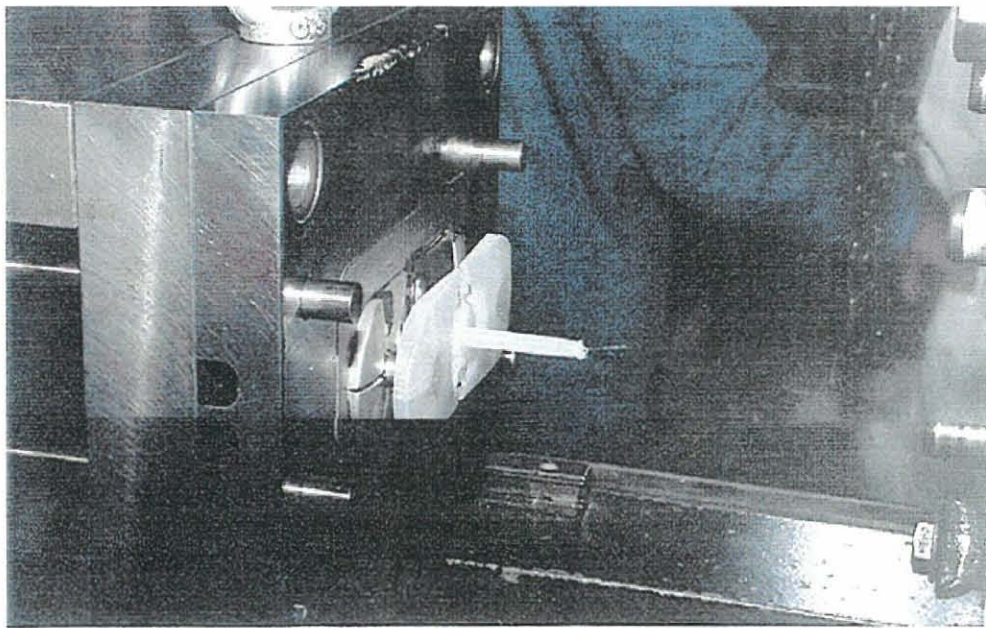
Moving Half with Epoxy Plated Insert Mounted in Injection Moulder
